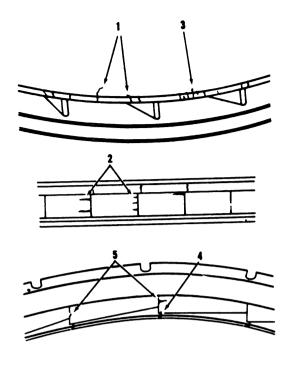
Turbine assembly, removal, disassembly, reassembly and installation.
